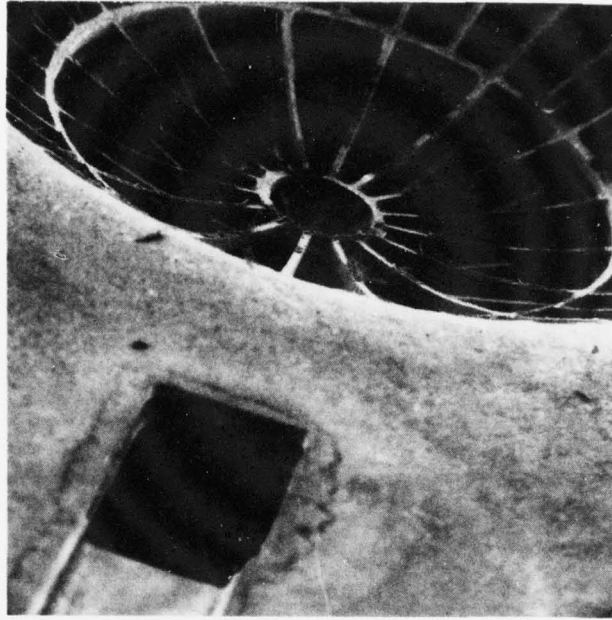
SIDE VIEW OF SANDWICH GRID AFTER SPACER REMOVAL SHOWING ONE OF THE FLUSHING SLOTS.
